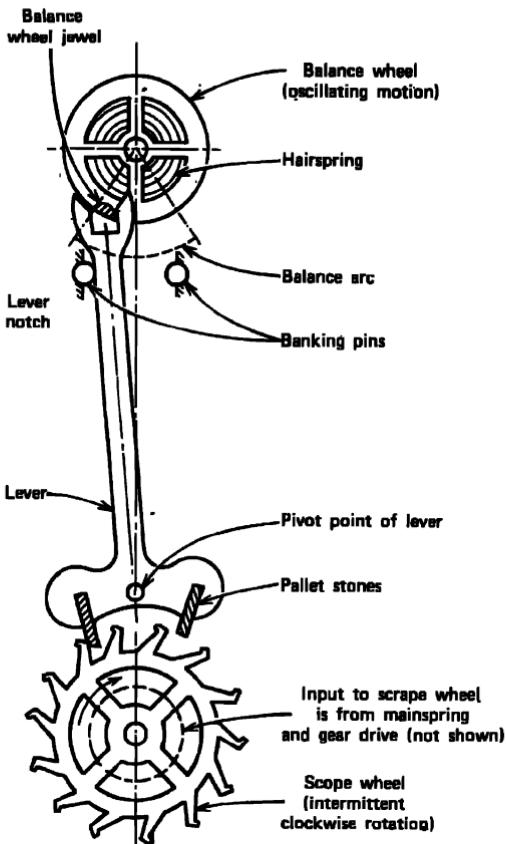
Principal elements of a balance-wheel escapement mechanism. Balance wheel and lever constitute a vibrating system with a fixed period, which governs the clockwise rotation of the scape wheel. (Courtesy of McGraw-Hill Book Company. From Reference 8.)
